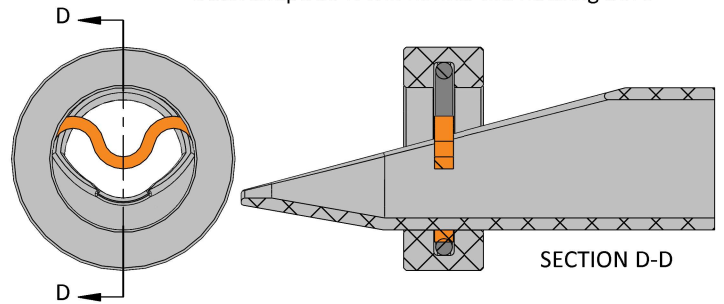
Continue pushing rod resizing tool so PTFE seal deforms into seal groove.
